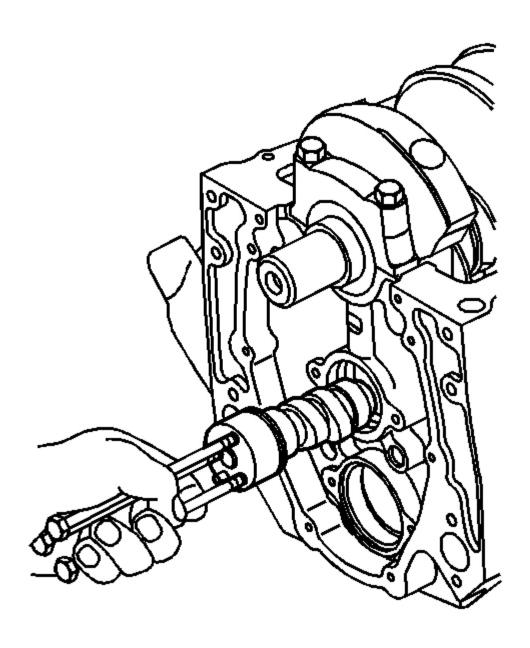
View Of Engine Camshaft Front Bolts Courtesy of GENERAL MOTORS CORP.
